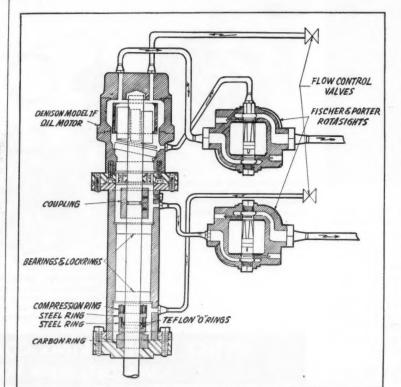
Cross-section of sealing assembly, oil motor and rotameters
